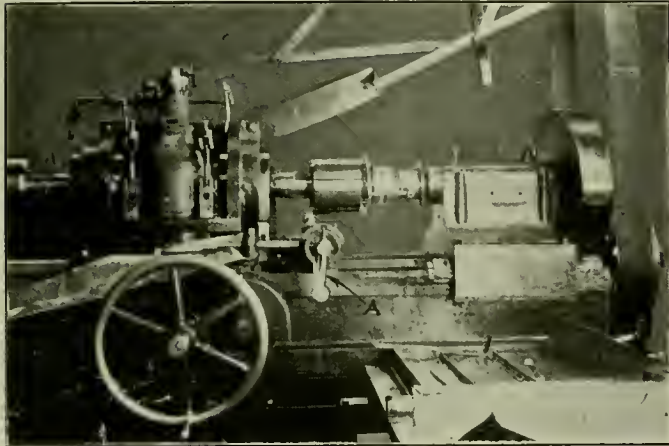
Front View of Heavy Two-Head Boring, Facing and Tapping Lathe Equipped with Oilgear Feed Control
